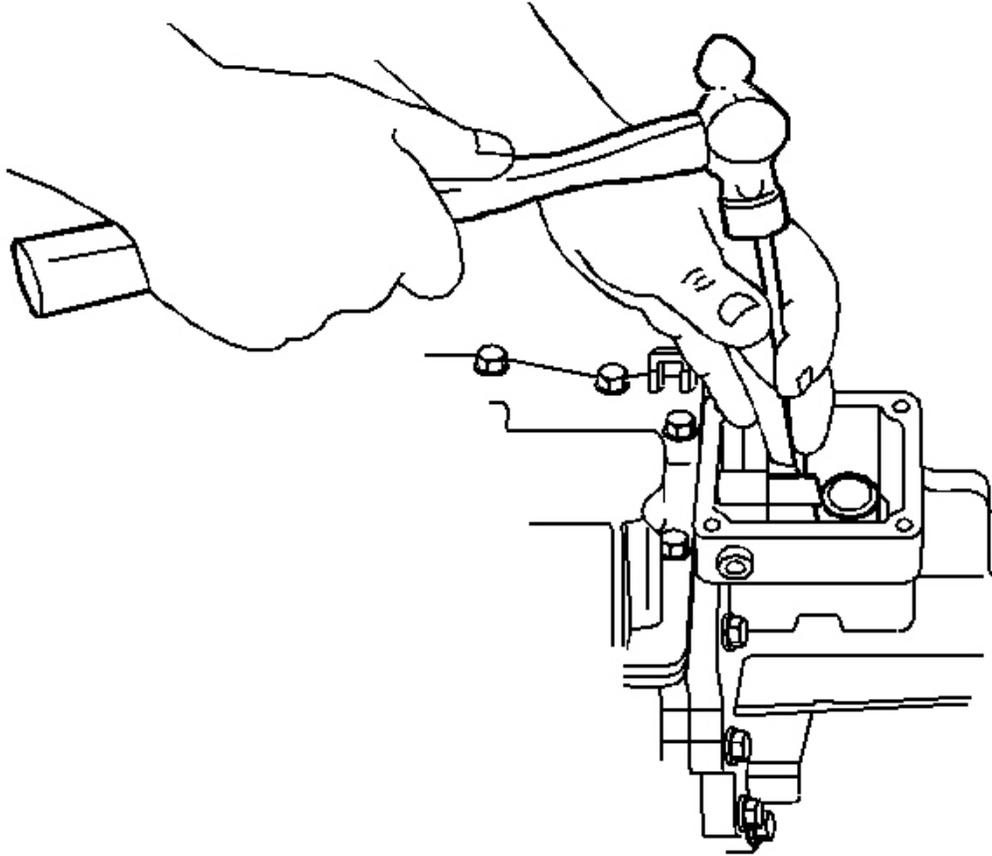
Installing Rear Offset Shift Lever Roll Pin
